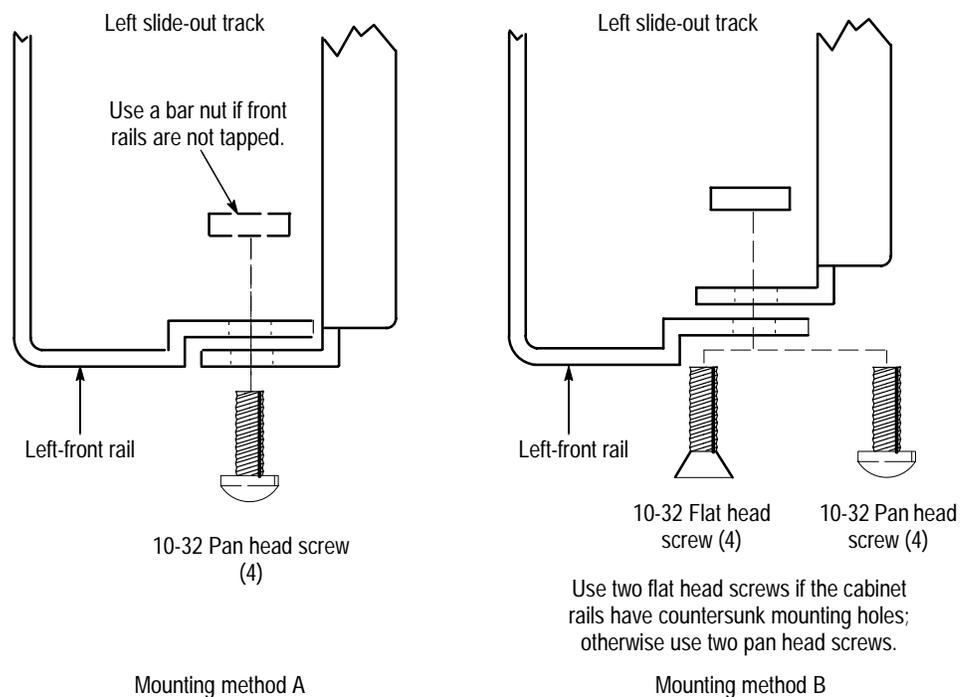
Installing the slide-out track assemblies in the rack (top view)
